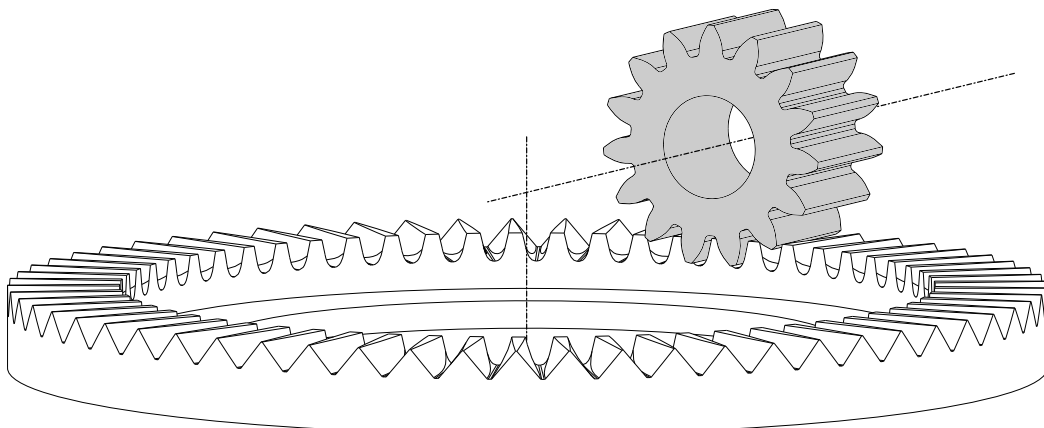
Exemplary face gear drive. Pinion in gray and face gear in white. Reprinted from Ref. 8.
